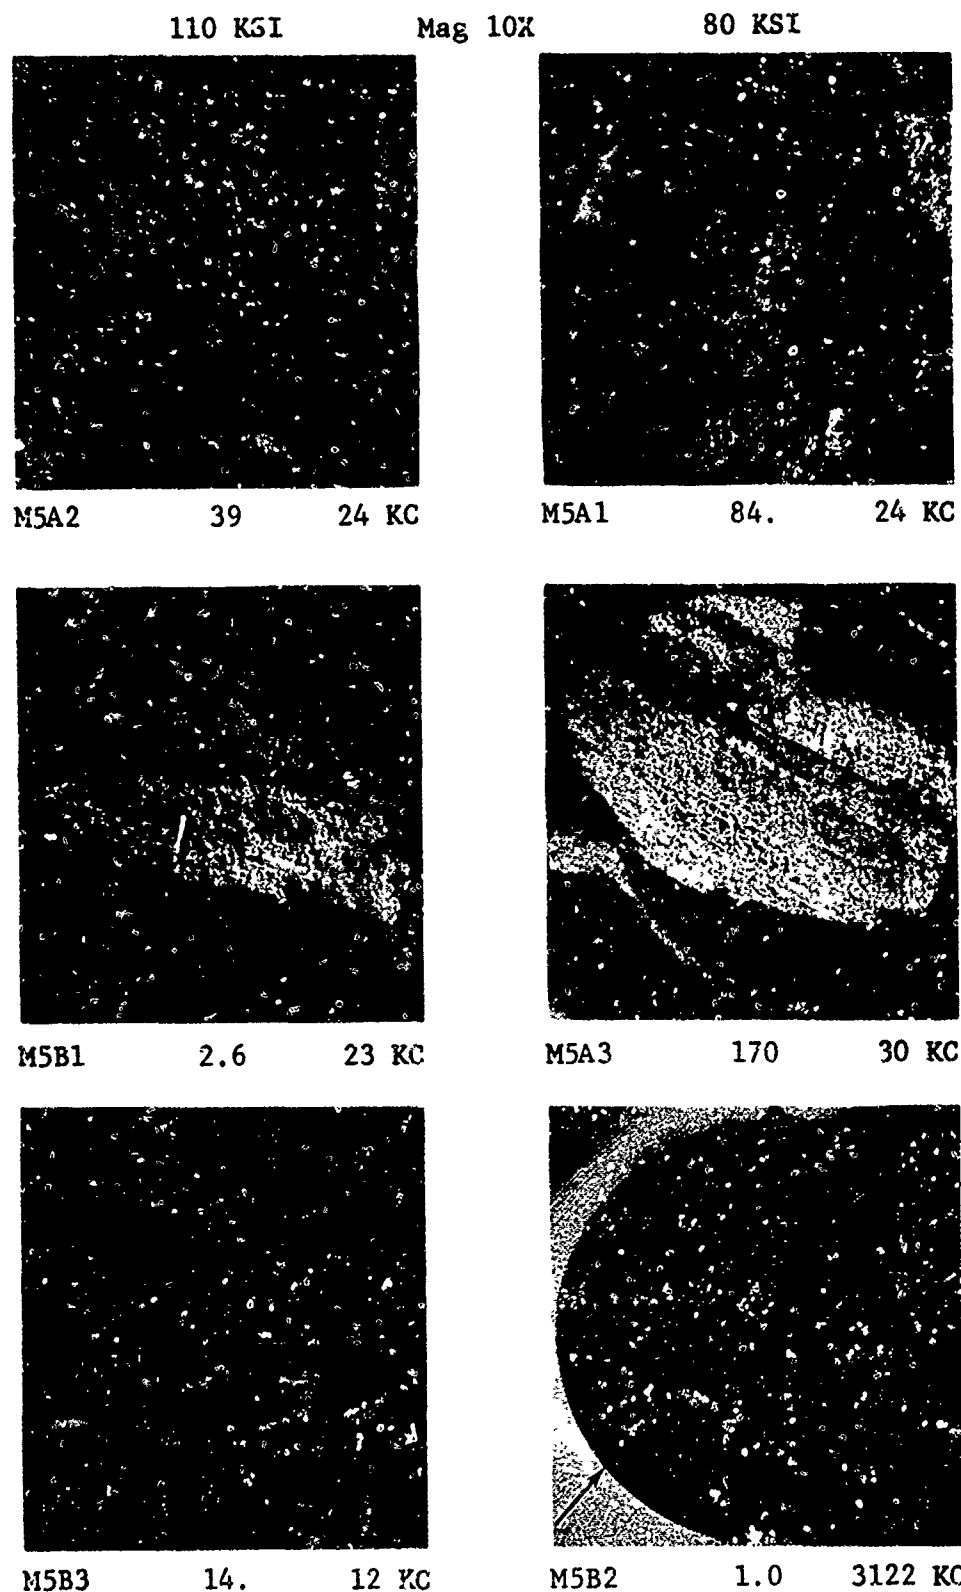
Fracture Surfaces of Failed Fatigue Specimens Series M5-Double-Bond/Two-Axis Diffusion Bonded with "Optimum" Deformation
